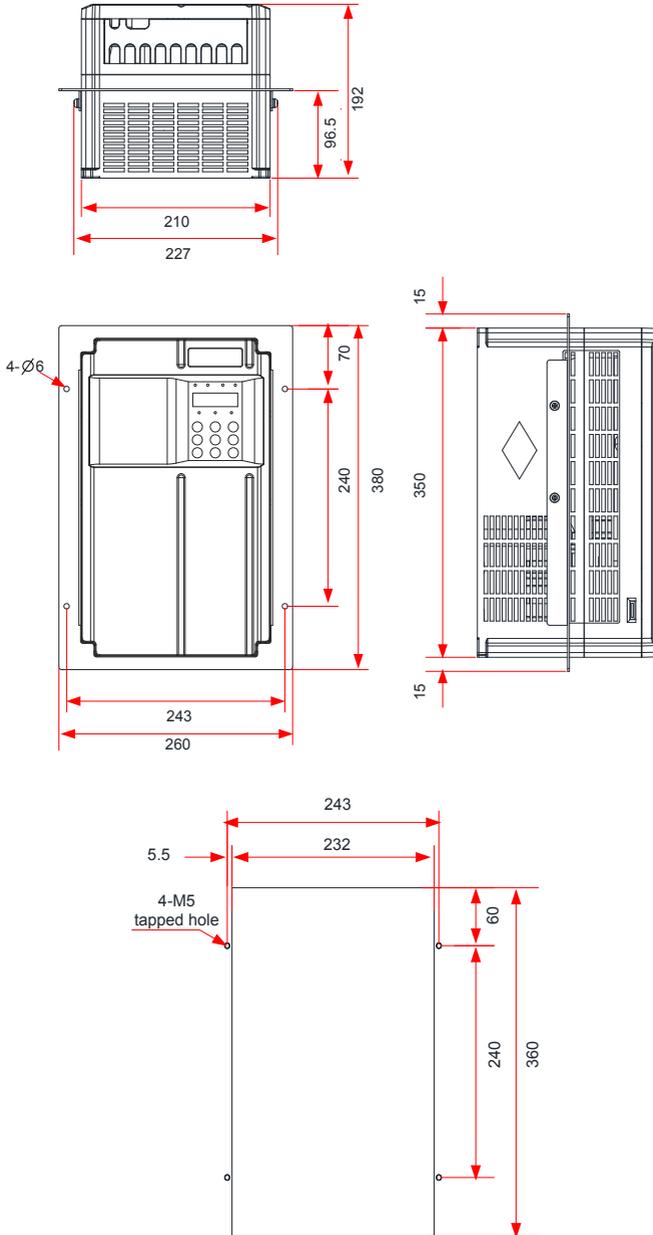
Intermediate mounting bracket dimensions and hole spacing for 18.5-22 kW AC drive models
